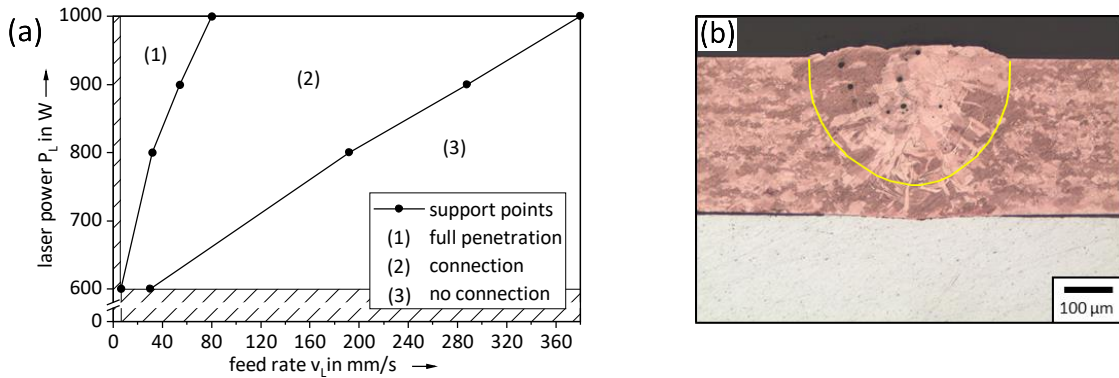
(a) Investigated parameter space and (b) metallographic cross-section of a weld seam for $P_L = 1000$ W and $v_L = 360$ mm/s
